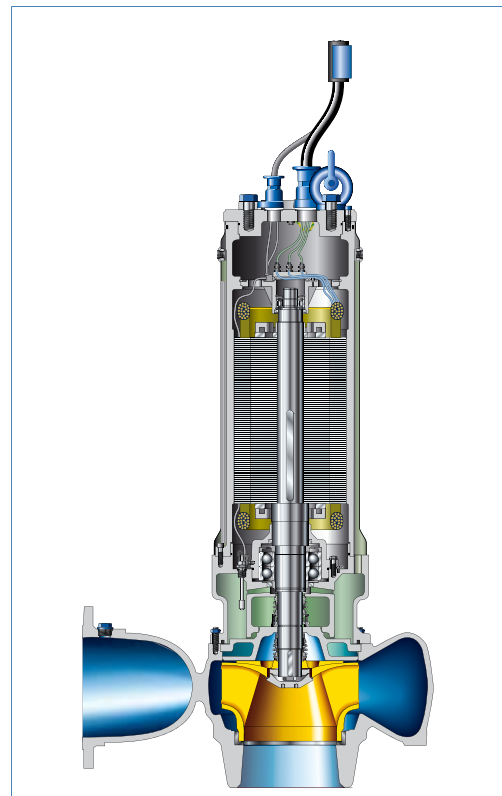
Sectional drawing of a KRT > 60 kW
